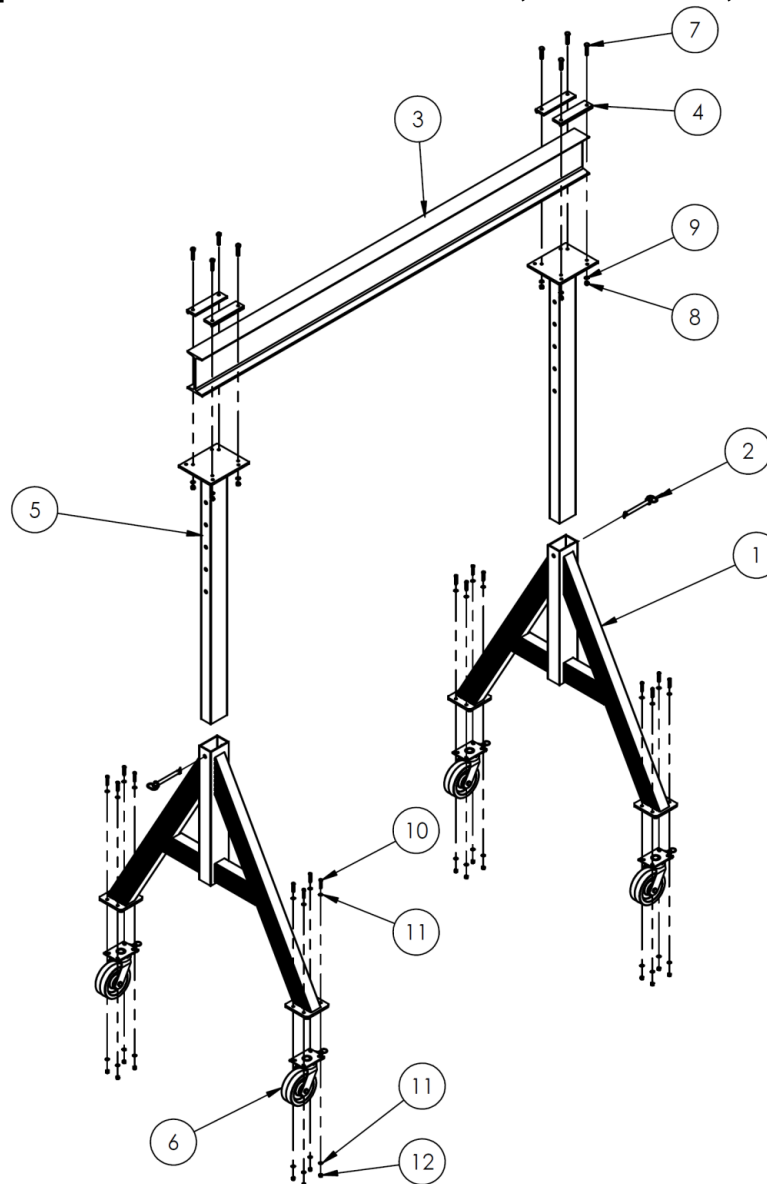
Exploded view of models AHA-4-15-8, AHA-4-15-10, & AHA-4-15-12
